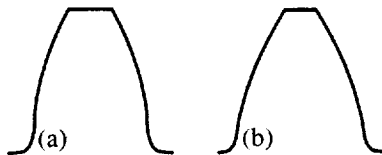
Gear tooth shapes, 8 pitch, 28 teeth, pitch radius, $r_p=1.75$ in. (a) 20° pressure angle, (b) 25° pressure angle.
